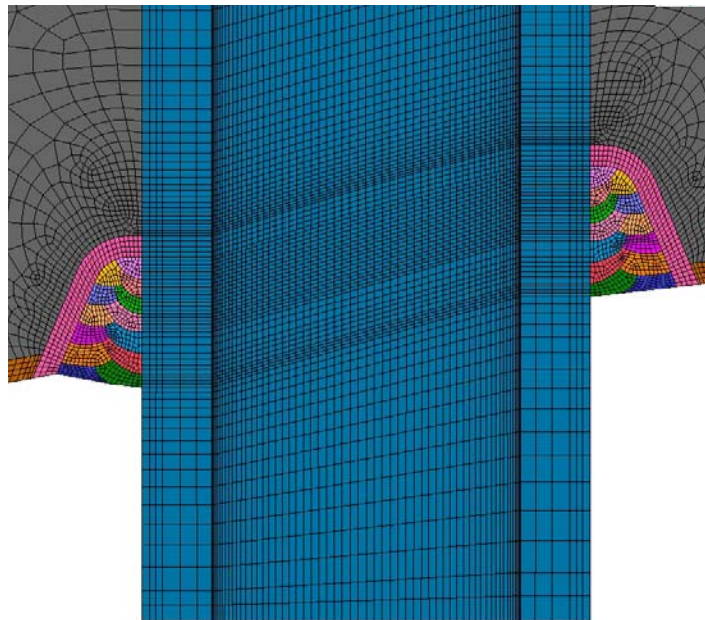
Close-up view of 13-pass J-groove weld joining CRDM Nozzle 3 to alloy-steel head.
